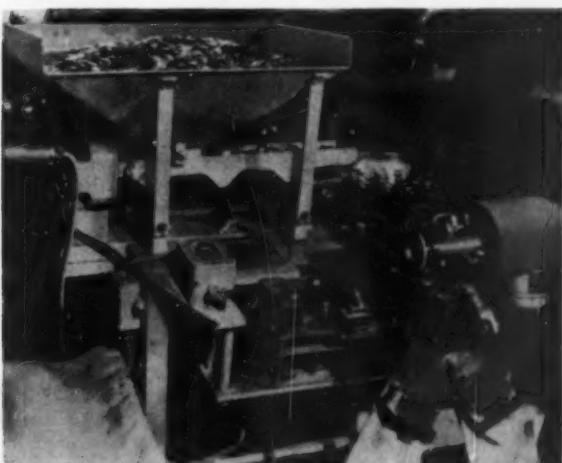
Counting of the finished coins is the final operation in the minting process. G.E.C. vibrating equipment is used on the telling machine.
